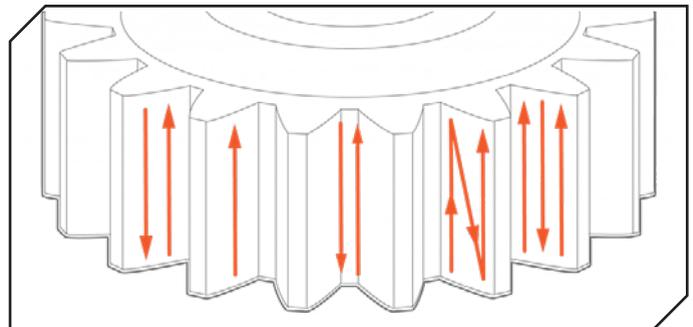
MBN instruments can measure gear flanks, roots, faces, ODs and IDs.
